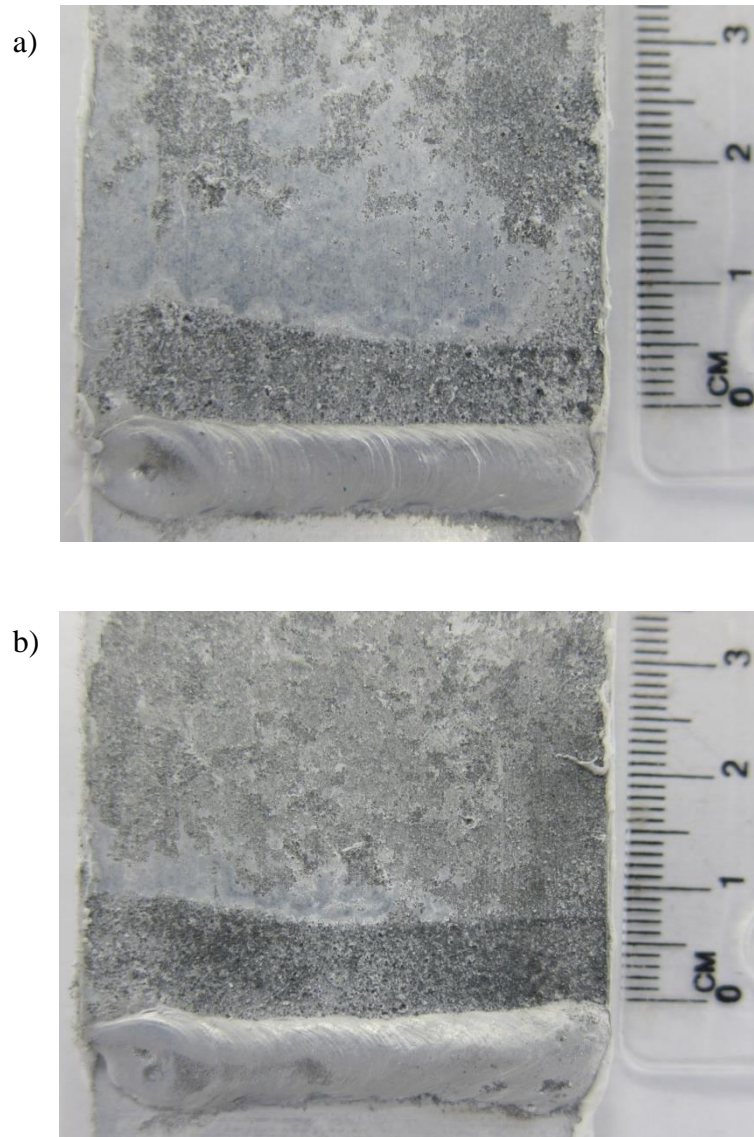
Close up images of duplicate samples of lap-joint welded configuration A3 (ER5356/AA7003/L) in the as-welded T6+PB condition.
